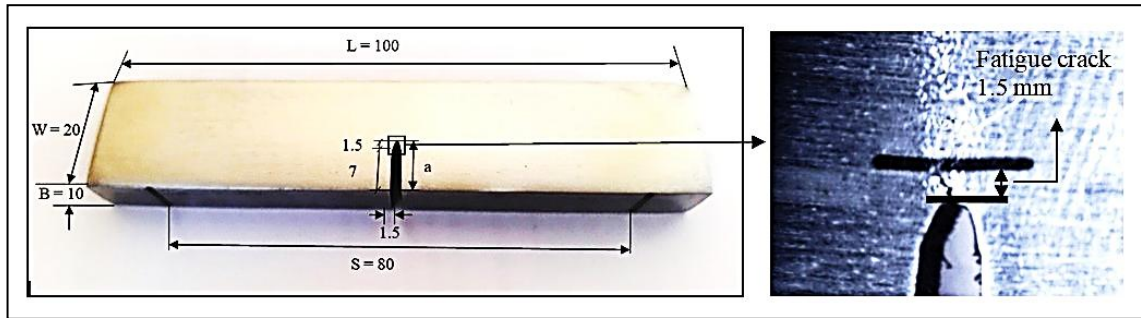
A standard specimen with for the three-point bend test with magnified view of fatigue pre-crack
